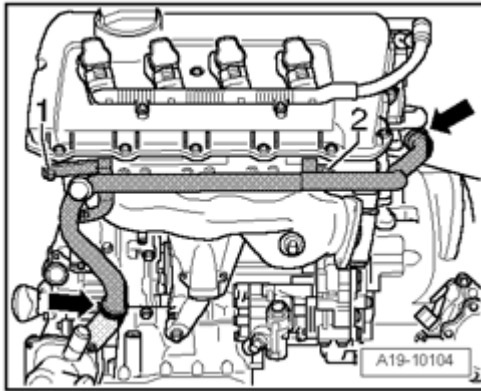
Removing Bolts & Loosening Hose Clamps And Removing Left Coolant Pipe From Coolant Hoses
